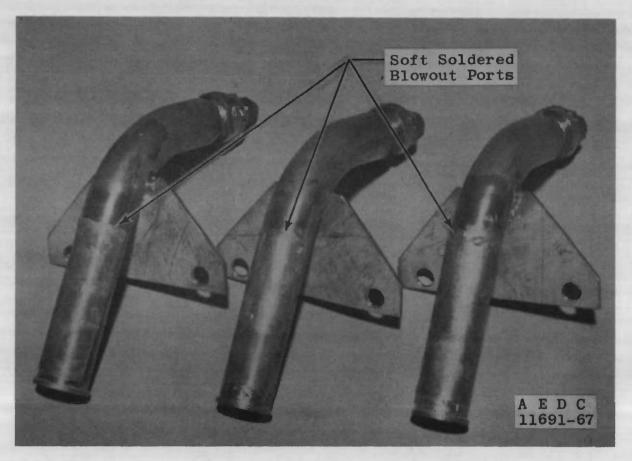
Oxidizer Pump Primary Seal Drain Tubes
